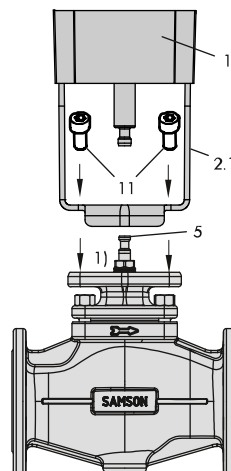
Mounting · Version with actuator yoke and V2001 accessories
